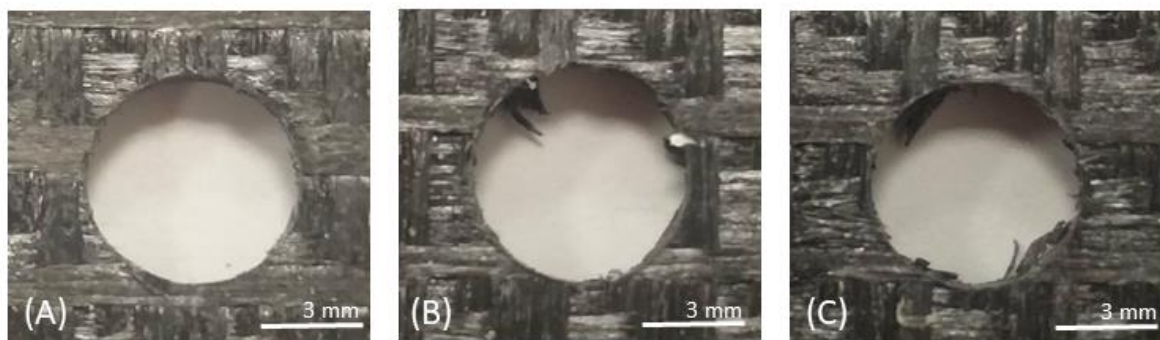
Optimised drilling parameters (Tool rotational speed, tool feed-rate), (A) achieved the cleanest cut and had no visible surface damage or delamination present, this was then used for following tests : (A) 7500 RPM, 53 cm/min; (B) 2800 RPM, 53 cm/min (C) 1600 RPM, 53 cm/min.
